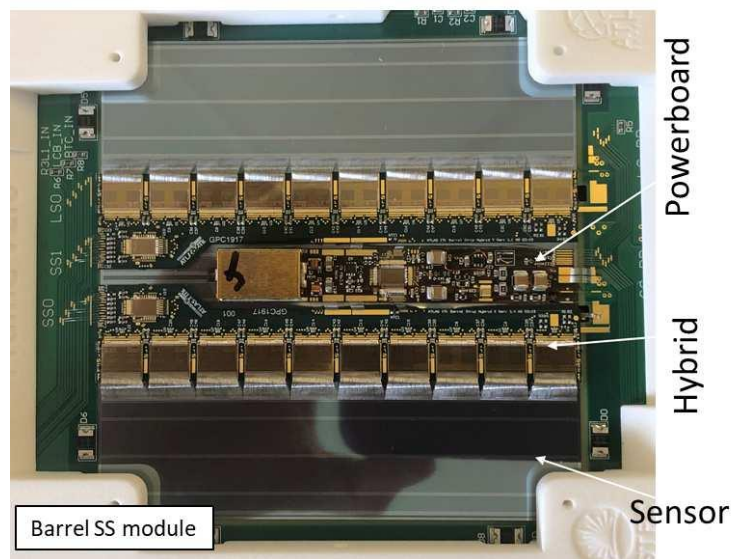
A barrel stave module consisting of a sensor, a printed circuit board (labeled hybrid) and a powerboard as presented in Ref. [102].
